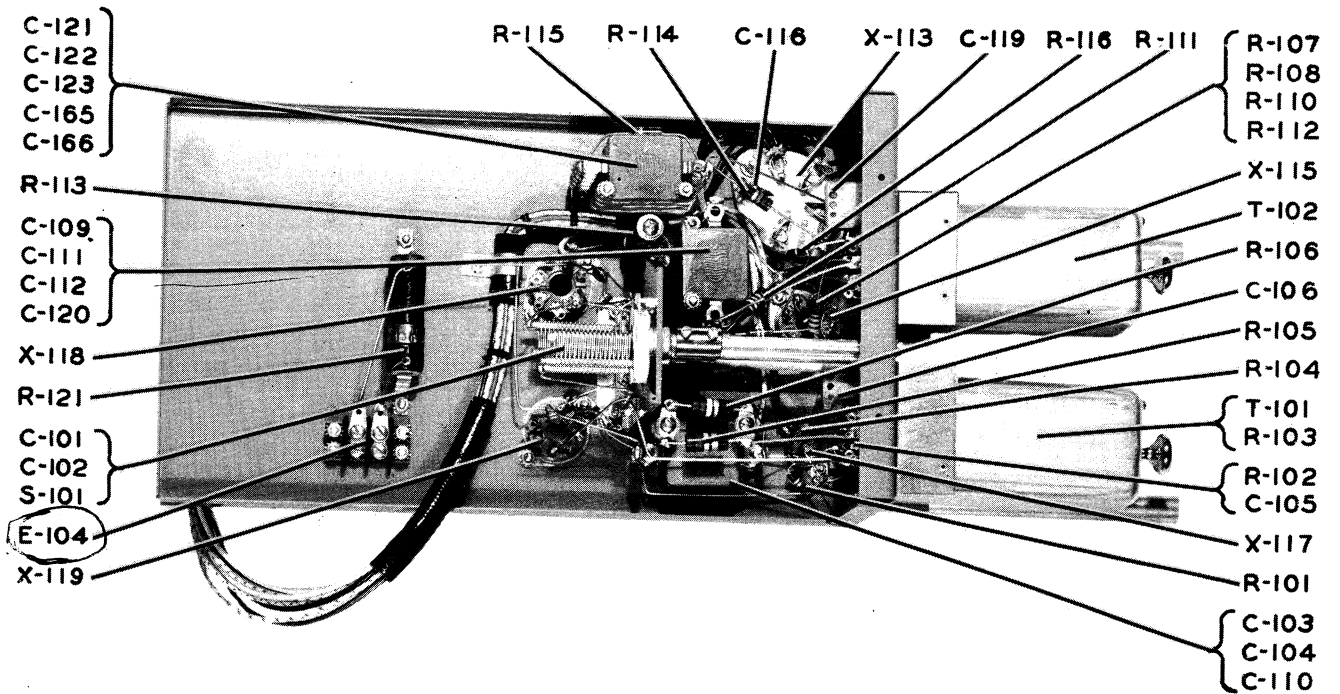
RF CHASSIS PARTS ARRANGEMENT, BOTTOM VIEW
